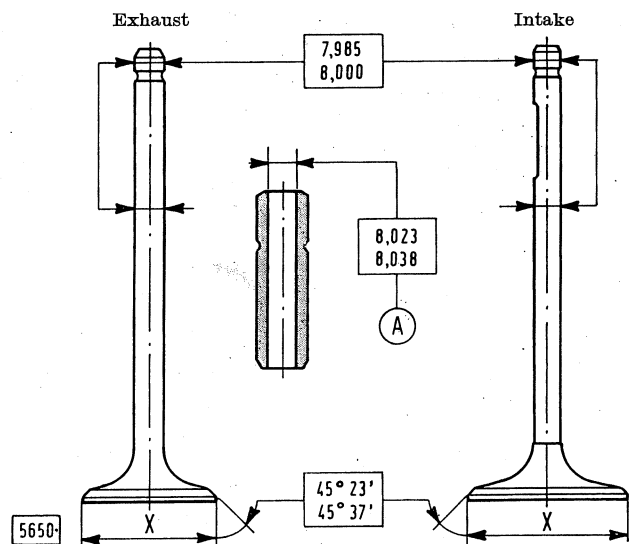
Major dimensions of intake and exhaust valves and their guides.
